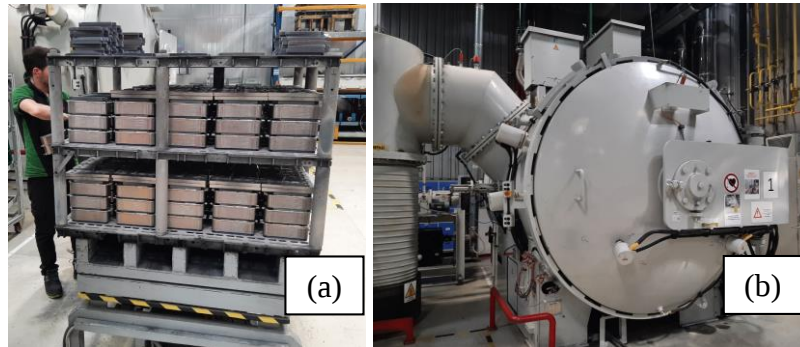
Weight Stacking (a) / Vacuum Brazing (b)
